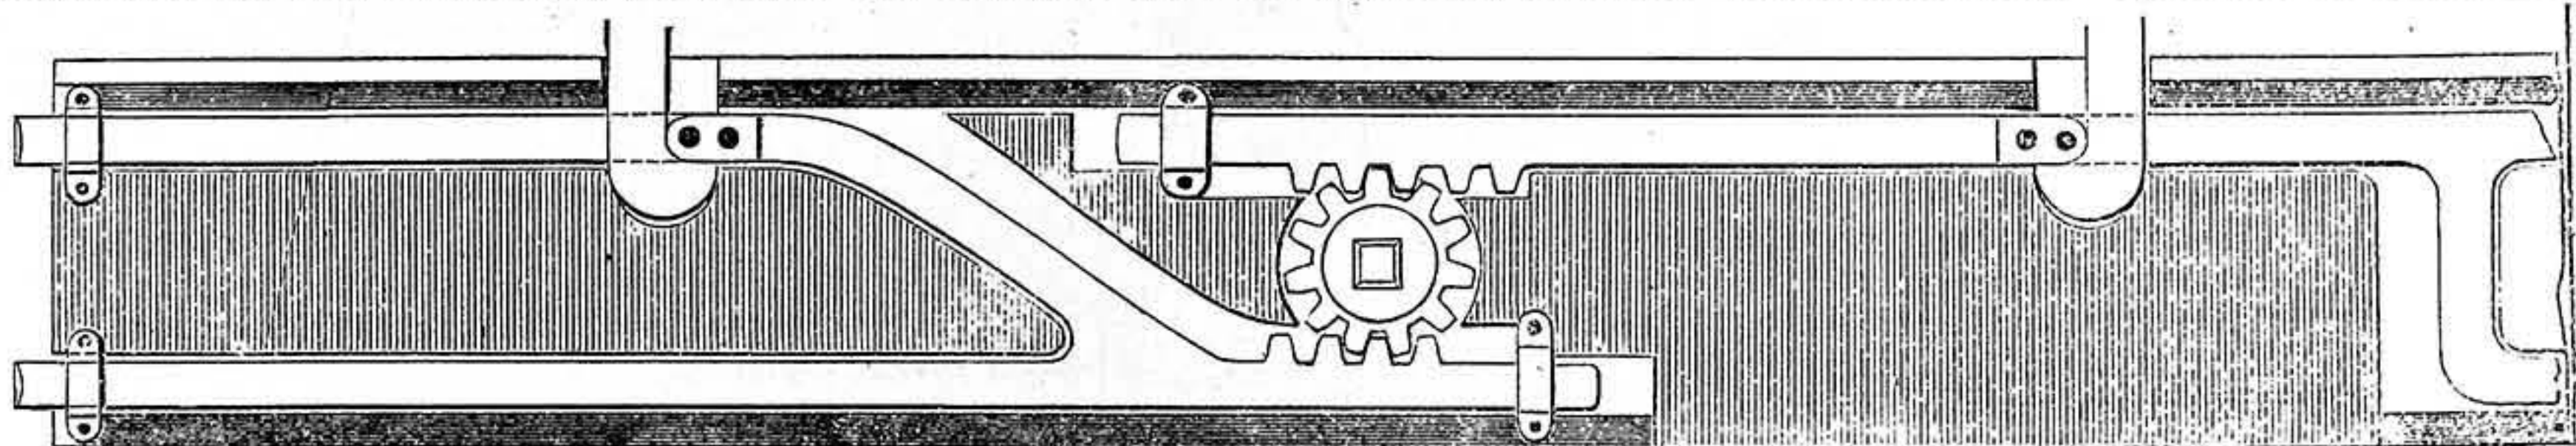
Desk-Flap enlarged, showing Arrangement and Lock Bolts. (Scale, 2 in. to 1 ft.)
